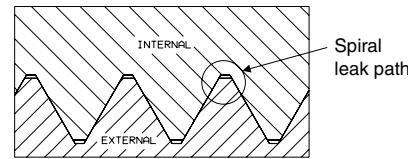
NPT: Wrench Tight, No Crest-Root Contact, Flank Contact Only
